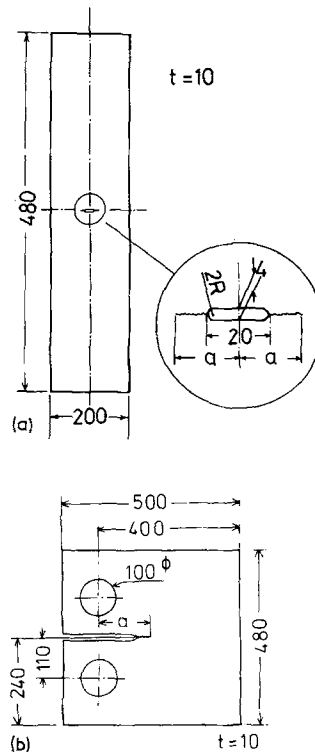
Fatigue test specimen. (a) Centre-cracked specimen (CC specimen). (b) Modified compact-type specimen (CT specimen).
